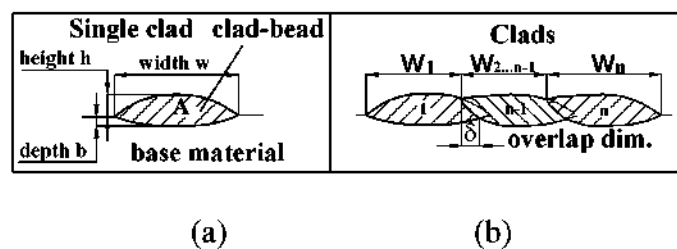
Geometrical dimensions of clad bead (a) single clad (b) overlapped clads
